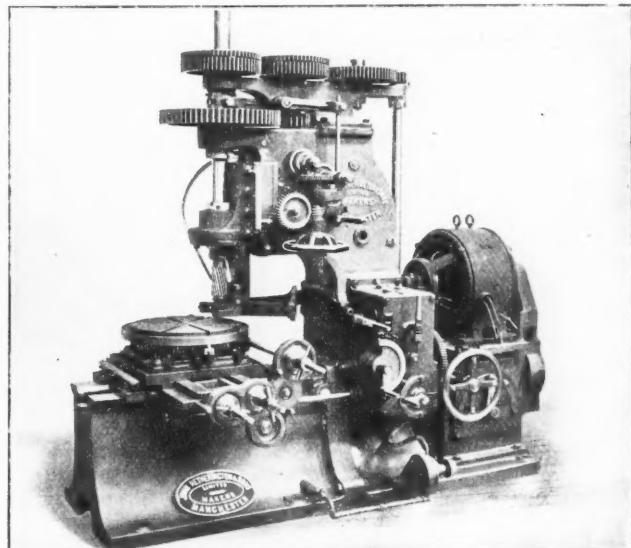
Hetherington Vertical Drilling and Milling Machine.
